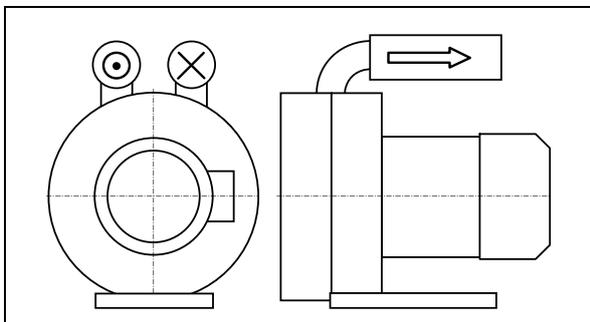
2BH1840-7J... (two-impeller pump-motor unit with double-flow design)
